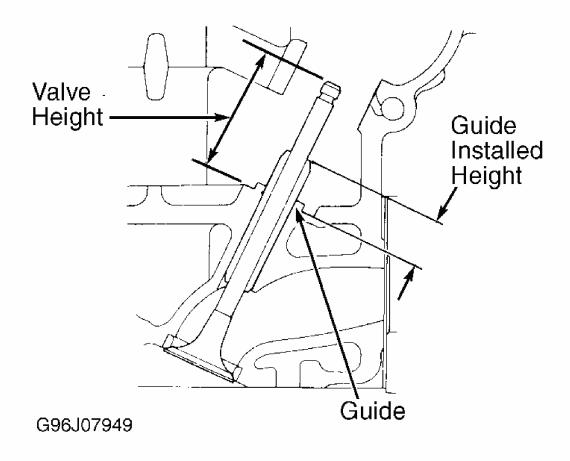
Measuring Installed Valve & Guide Height Courtesy of MAZDA MOTORS CORP.
